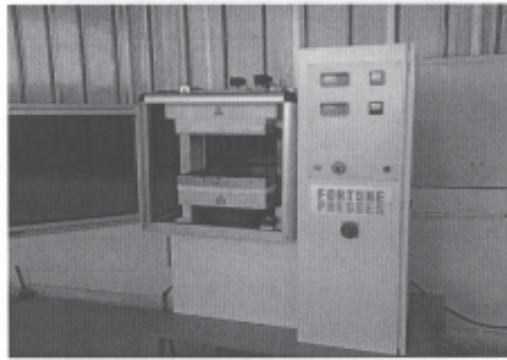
Electrical vulcanizing press used for processing of finished products [5]
